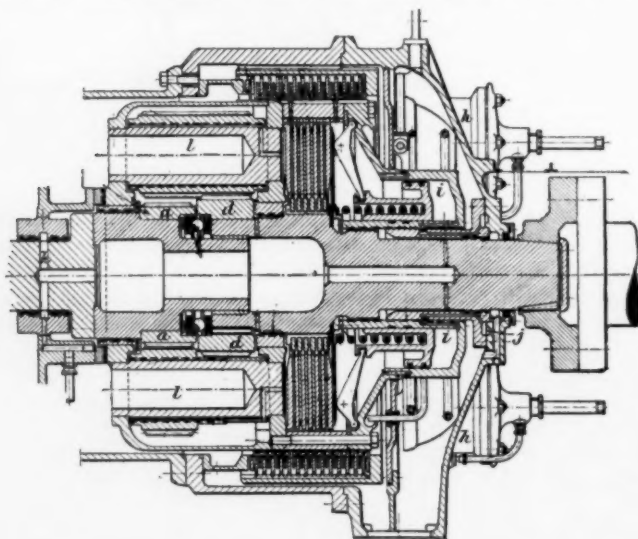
DETAILED VIEW OF THRUST BEARINGS AND LUBRICATION IN LJUNGSTRÖM EPICYCLIC REVERSING GEAR FOR MARINE TURBINES
